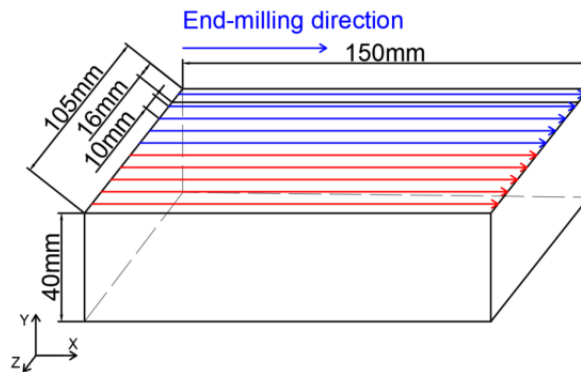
End-milling process of workpiece, blue line is stand for half machining tool path, tool path of full machining is combined blue line and red line
